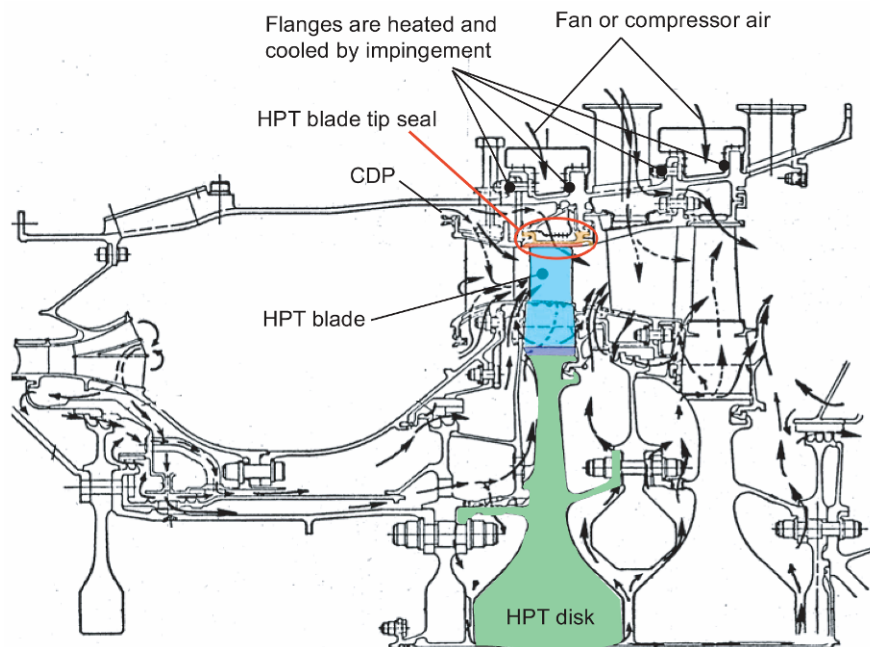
HPT blade tip seal location in a modern gas turbine engine (ref. 4).
